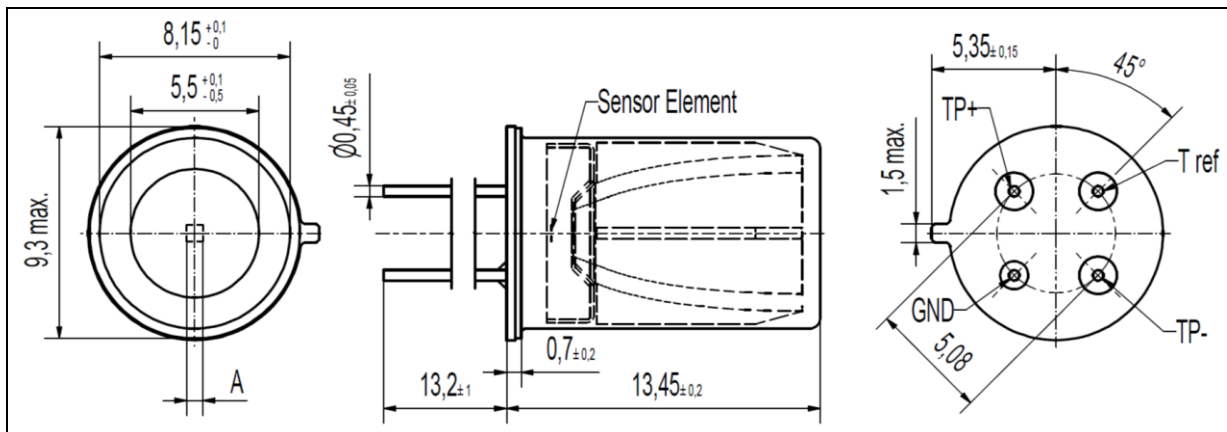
Mechanical Drawing of the TPD 1T 0226 IRA (Drawing No.: 2/71837-0)
